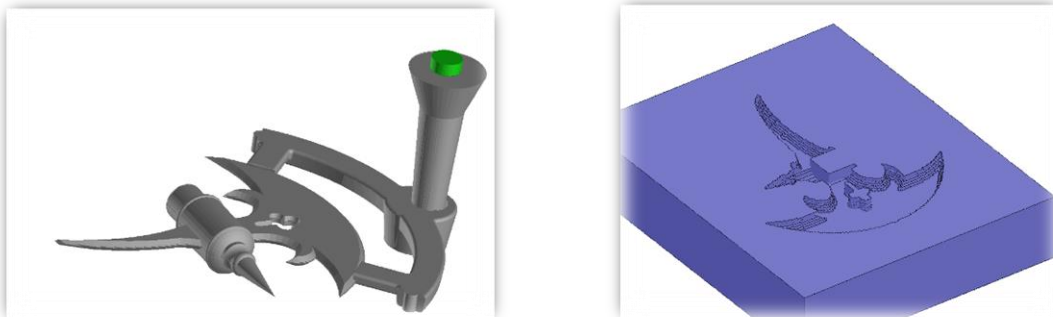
Assembly of the axe with gating system prepared for casting simulation in SolidCast.
